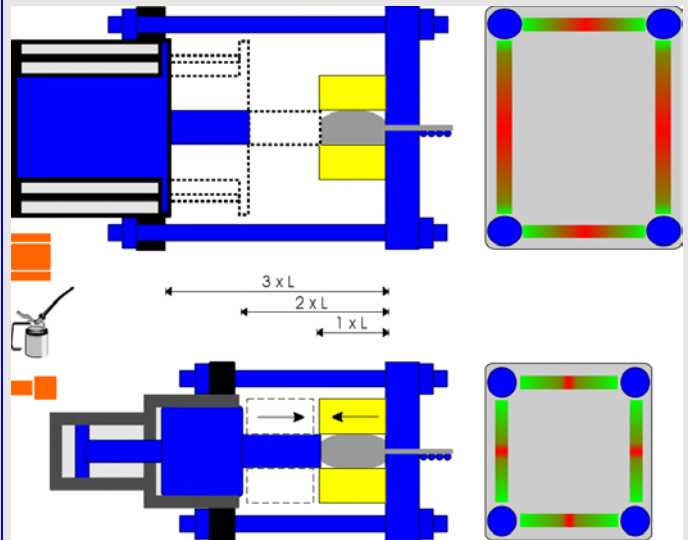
Loading principles back loading (upper) and front loading (lower position)
